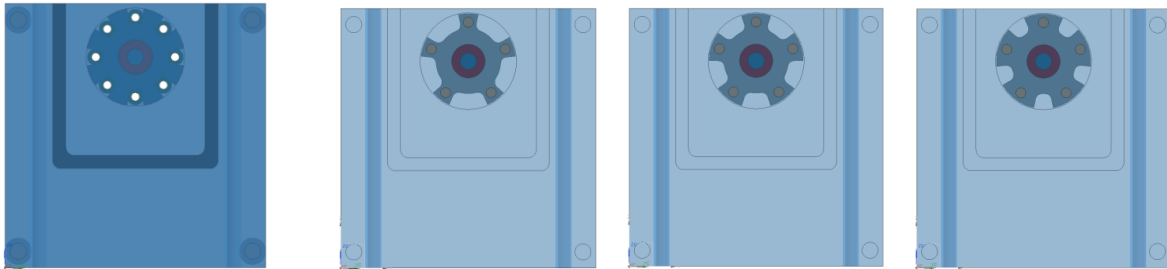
Eight Tooth Valve with Eight Port Injector and Five Port Injector Plate with Five Tooth Valves for Varying Pulse Duration
